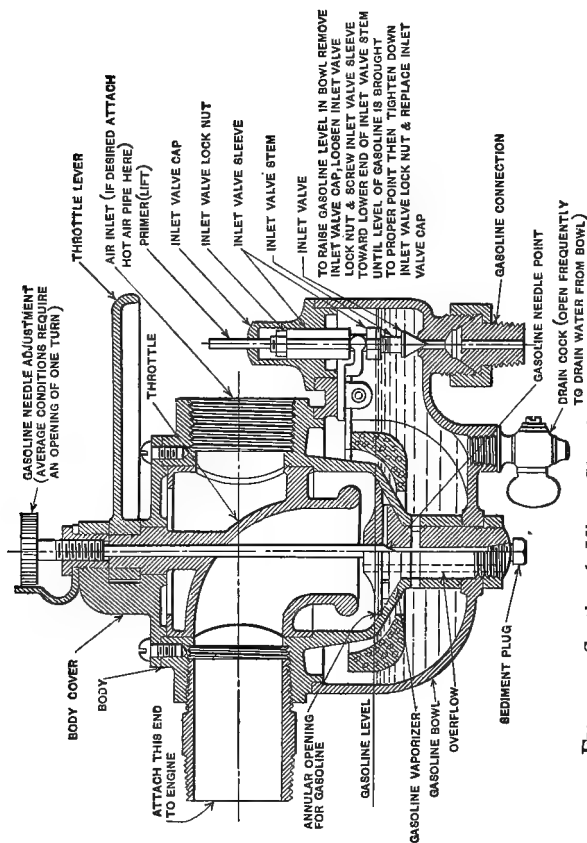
Sectional View Showing Parts of Kricke Carburetor.
